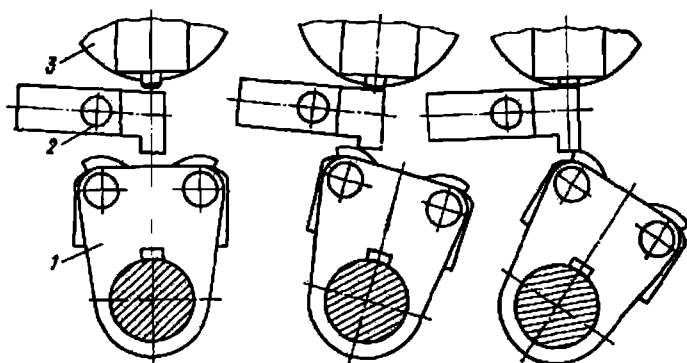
Opening sequence of pilot valve on Д and Д 30/50 engines
